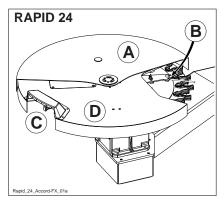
Photocell B checks whether or not there is a spindle in the gripper in tool change position. Check that the optic sensor is clean.
